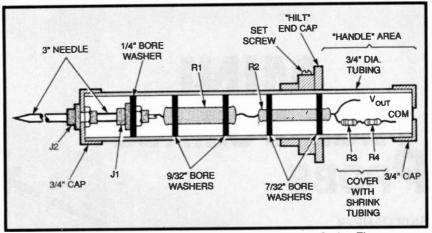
DETAILED ASSEMBLY VIEW of the Mini High-Voltage Probe. The neoprene faucet washers are identified as %-inch; however, their actual outside diameter is % inch.
